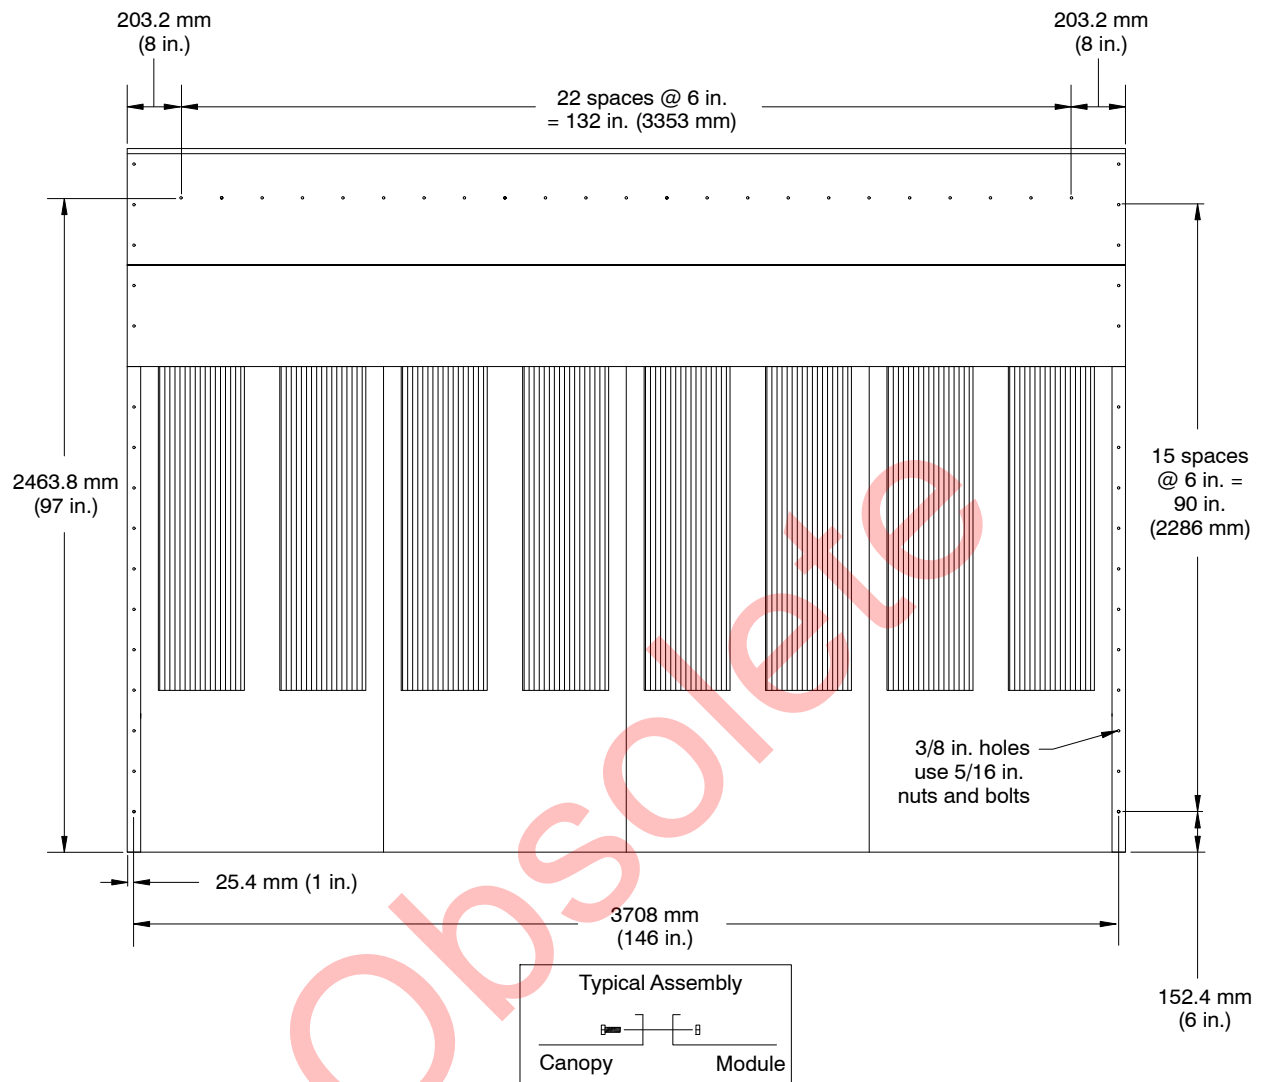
10,000 and 12,000 CFM Module to Canopy Mounting Dimensions
